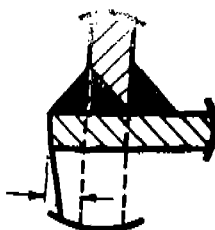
FUSION WELDS OF CROSS TUBES.
